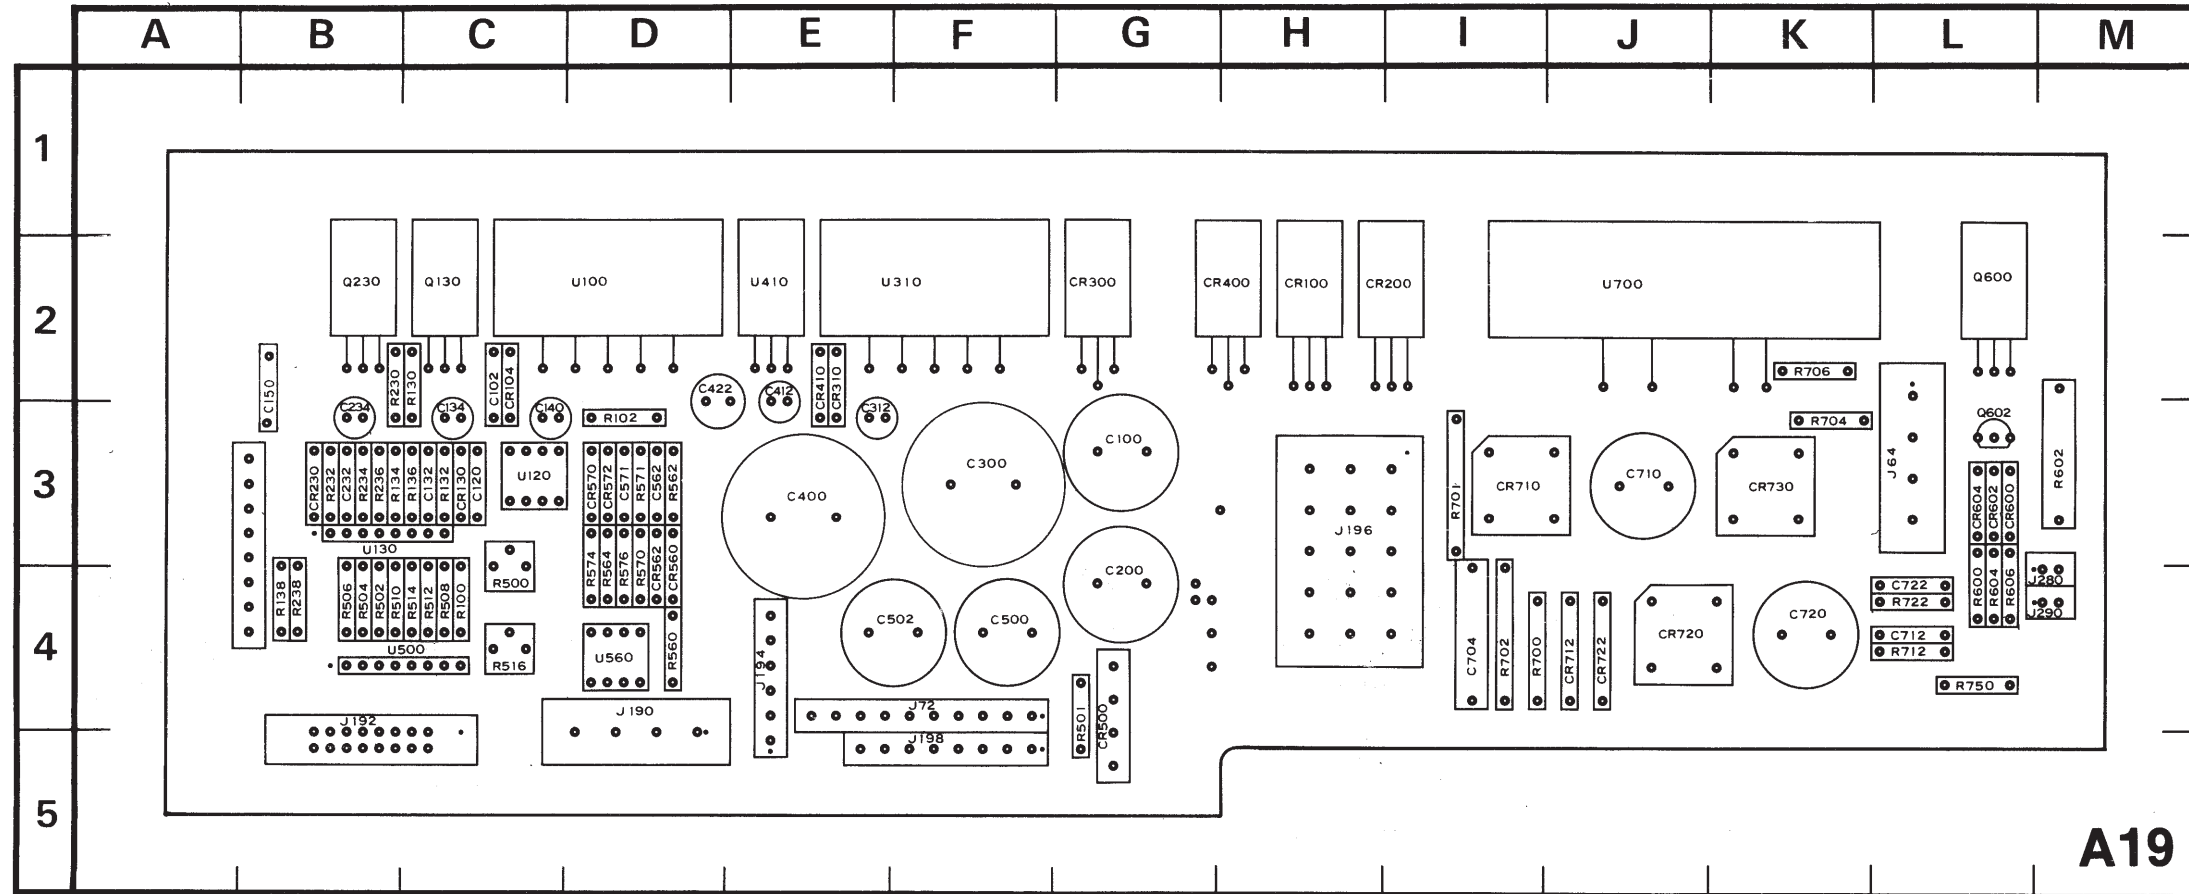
A19 — Low Voltage Supply circuit board assembly.
